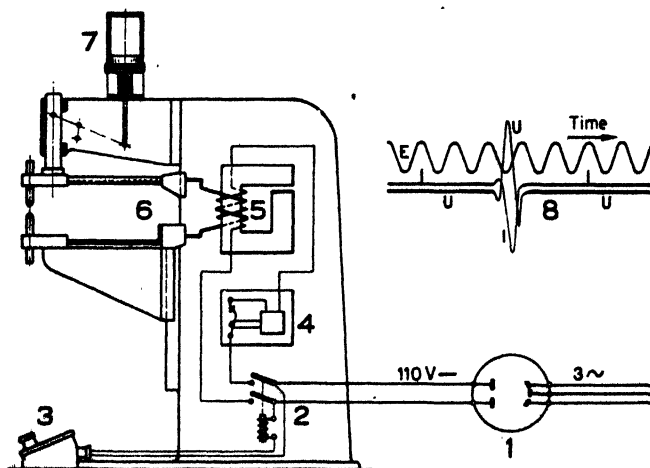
Sciaky heavy-discharge spot welding machine.
